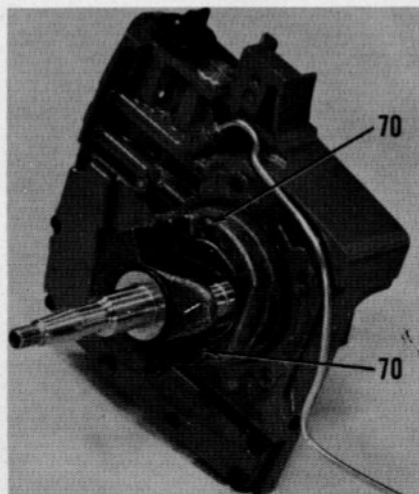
View showing crankcase removed from drive case and crankshaft on models equipped with ball bearing at drive end of crankshaft. To remove crankshaft from drivecase, bearing retaining screws (70) must first be removed.
